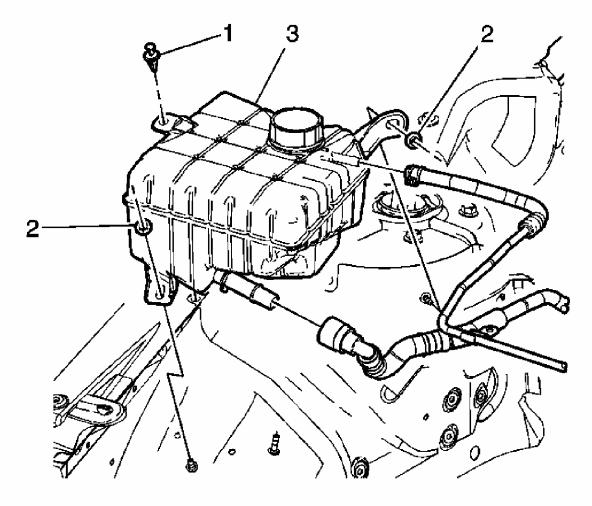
View Of Radiator Surge Tank & Attachments Courtesy of GENERAL MOTORS CORP.
